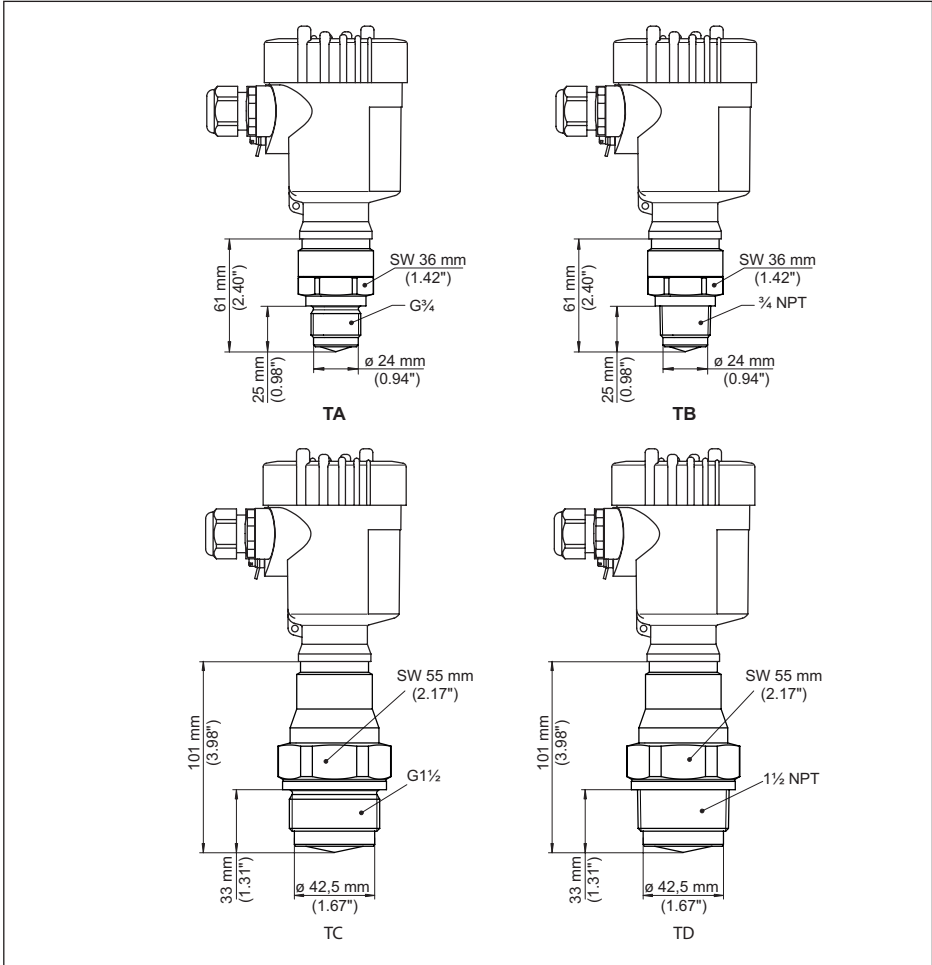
VEGAPULS 64, thread with integrated horn antenna
